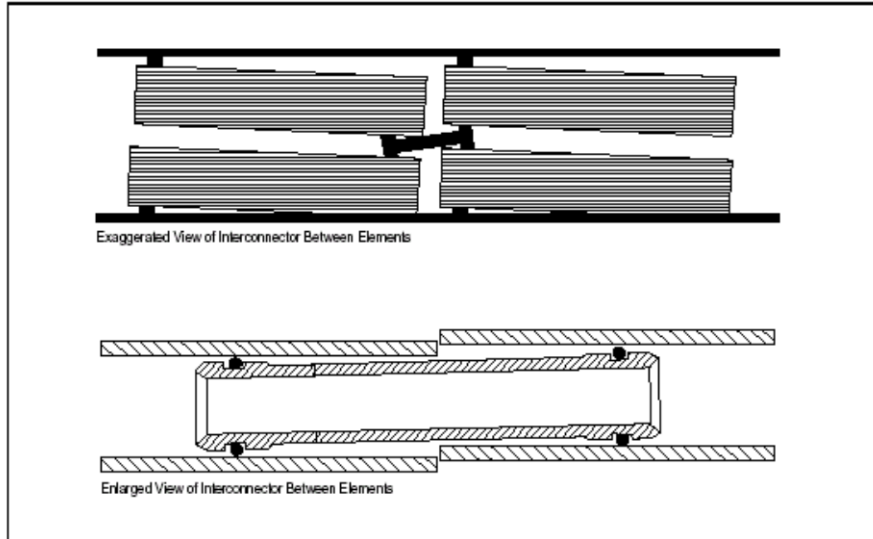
O-ring cross-section of 2 O-ring and "dog-boned" interconnector ends
